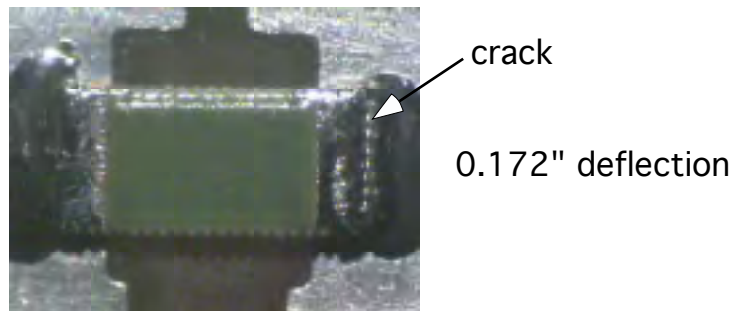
A RM1206 thick film device mounted on FR4 board showing the resistor to be undamaged and a damaged solder fillet after convex flexure.
